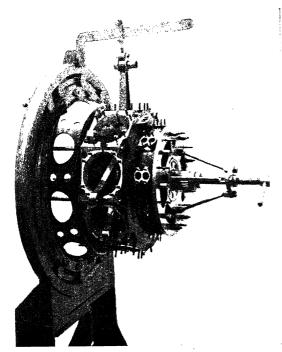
WITHDRAWING CRANKCASE FRONT HALF.
